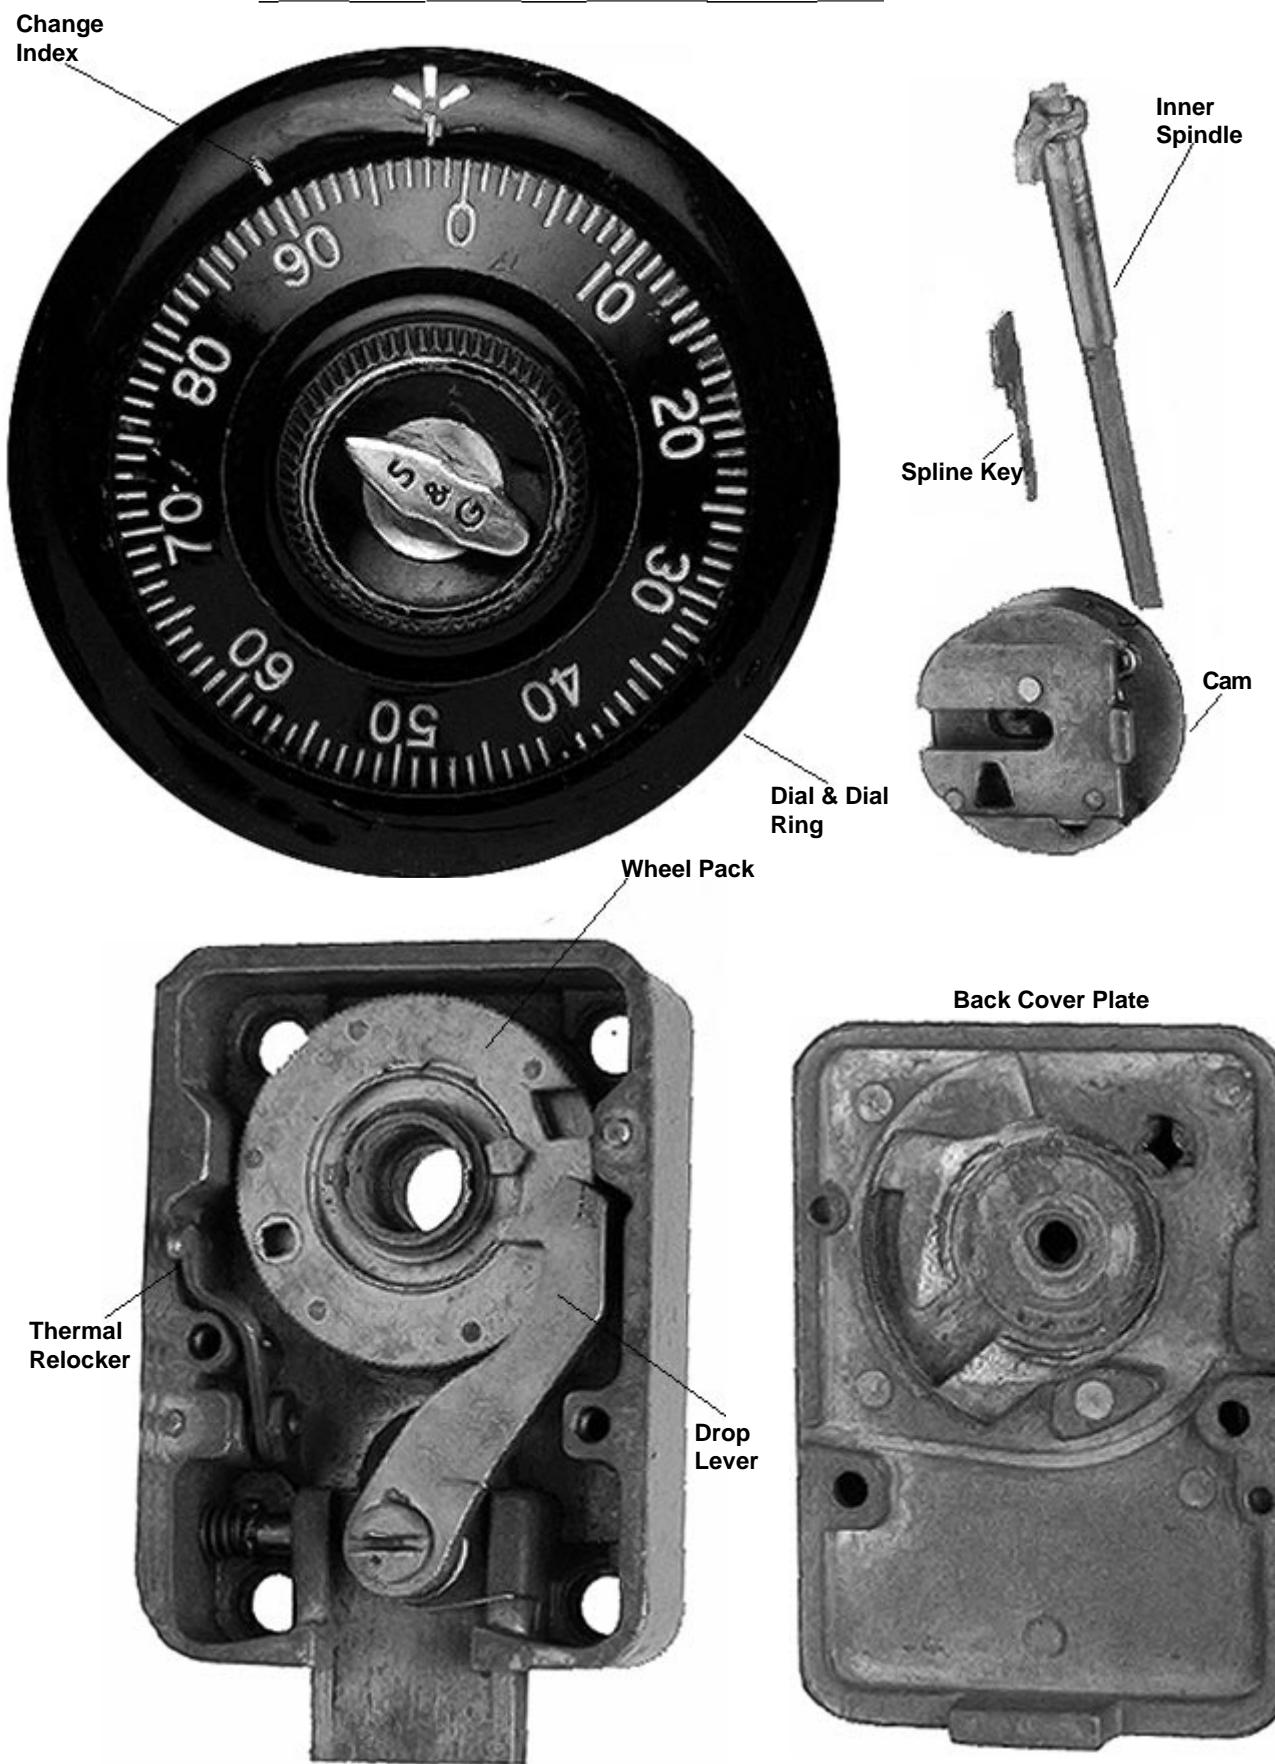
DISASSEMBLED HAND CHANGE WHEELPACK
